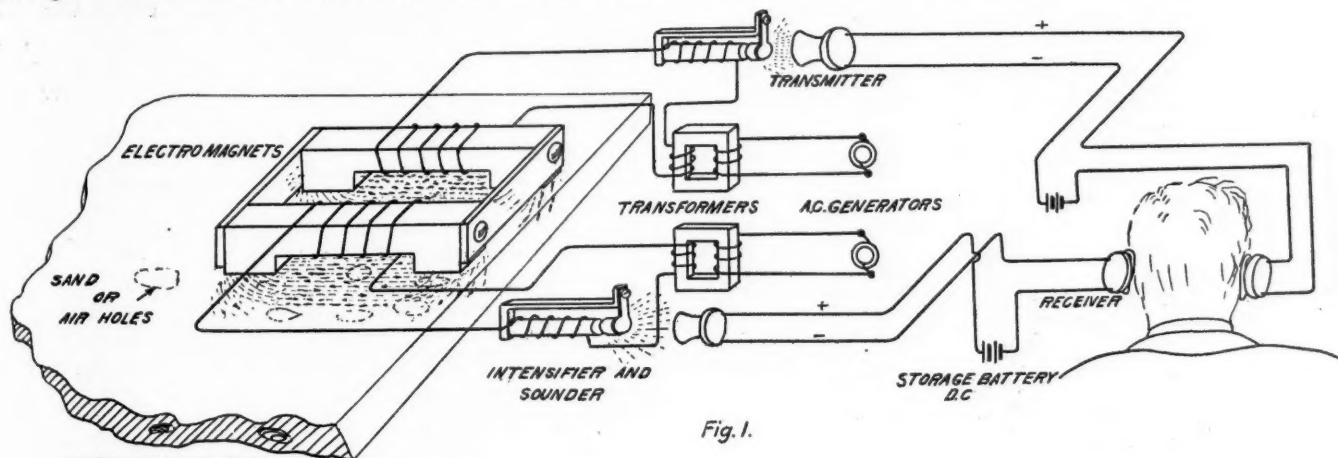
Testing Apparatus for Locating Air and Sand Holes in Iron.
